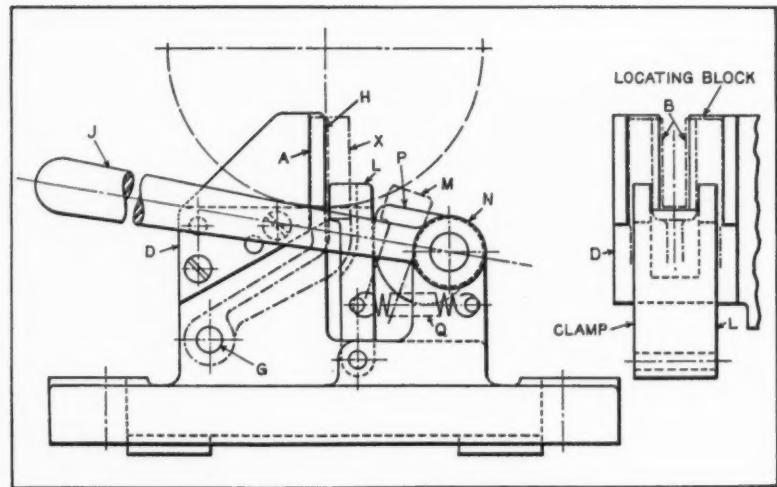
Wide-opening, Cam Type Clamp Applied to Milling Fixture
